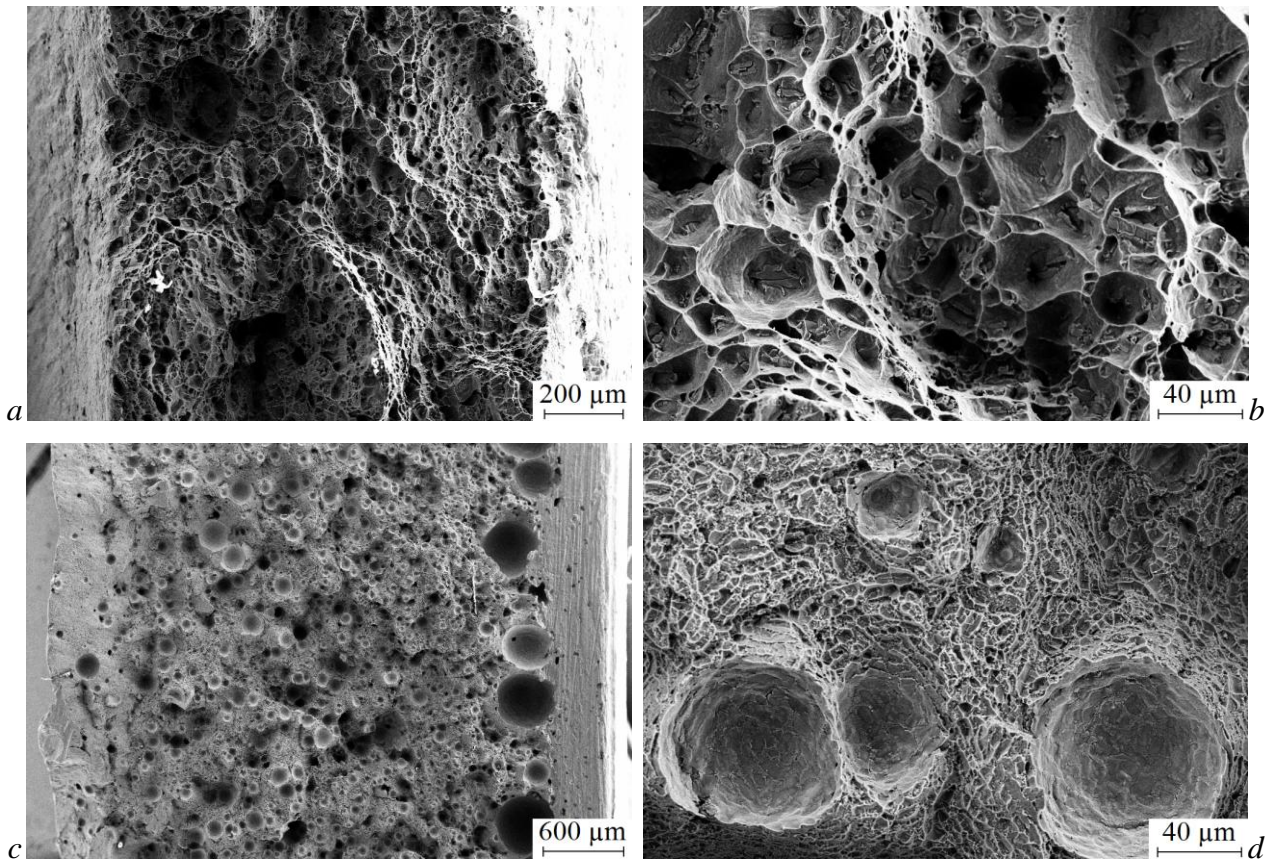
Fracture surfaces of transversal tensile specimens obtained from type B hybrid joints. Specimens broken in the HAZ of the transition joint, close to the Al-alloy weld seam (a,b) and in the Al-alloy weld seam (c,d); full-thickness view (a,c) and detail (b,d).
